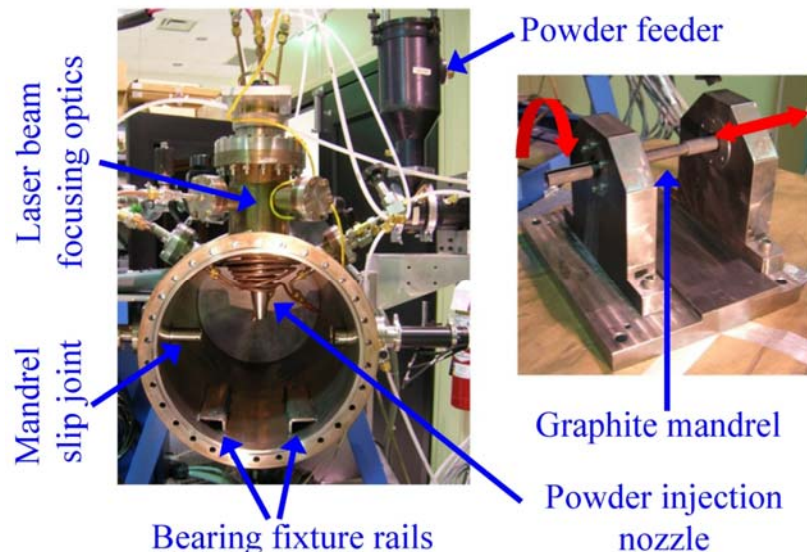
Controlled atmosphere processing chamber (left) and twin-bearing mount used to laser powder deposit refractory materials on graphite mandrels. The graphite mandrel rotates and displaces linearly under the laser beam.
